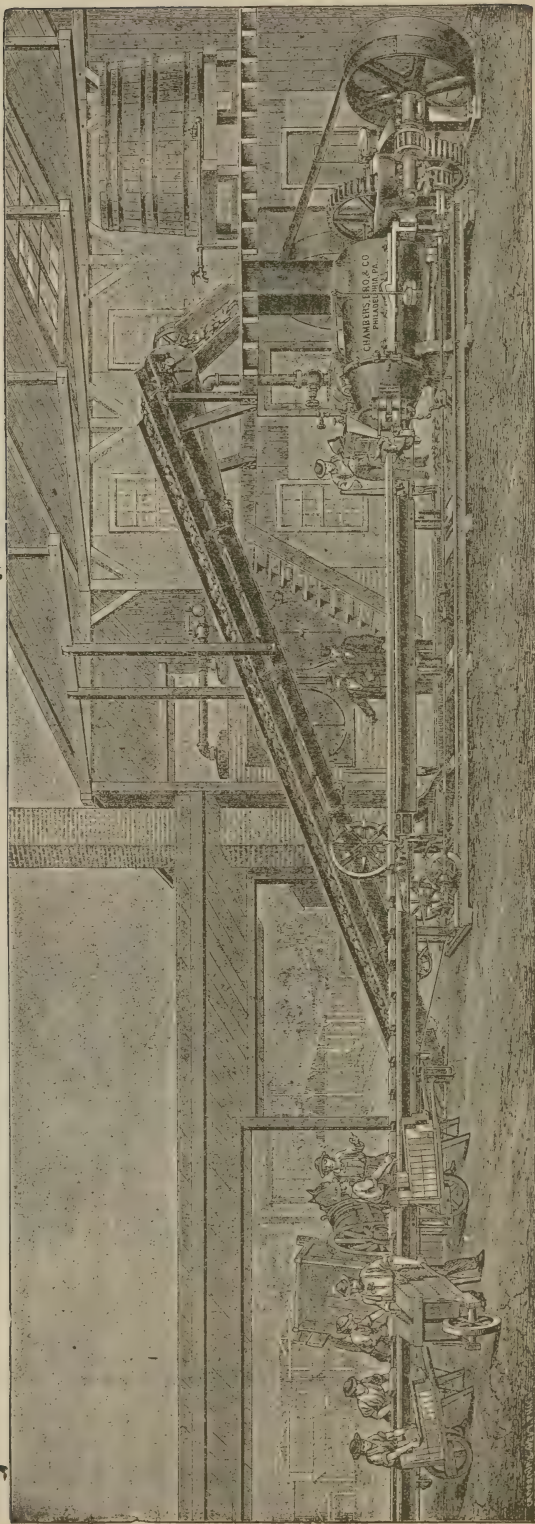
An automatic, stiff-mud, wire-cut, brick molding machine at work.
